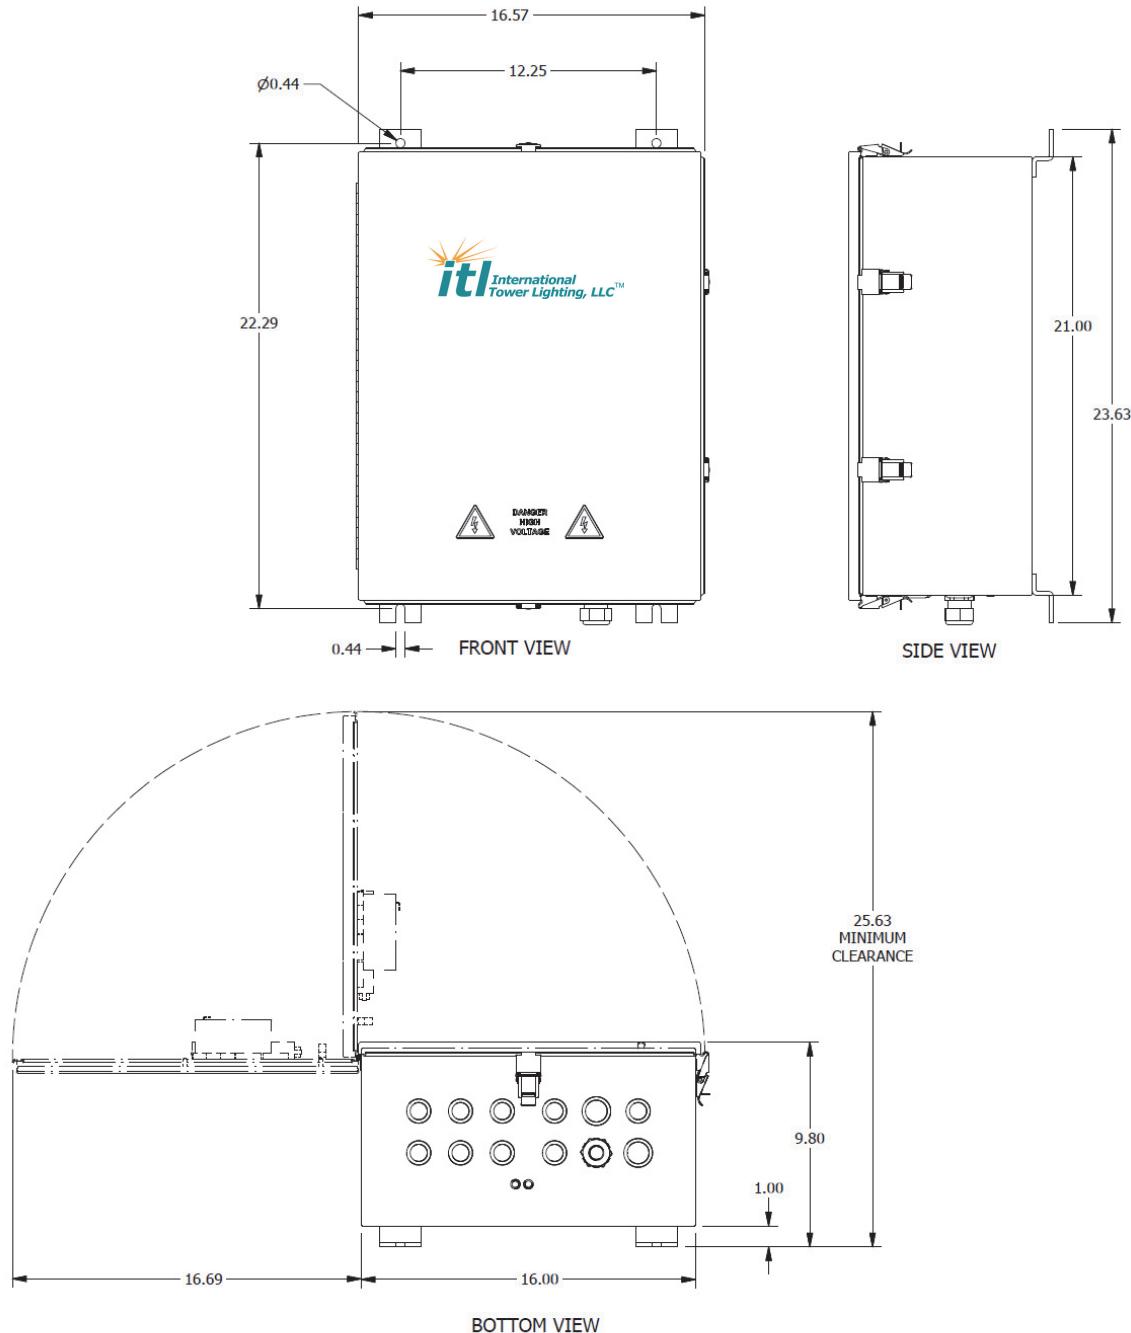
IPS-D1RW Power Supply Dimensions and Mounting Details
